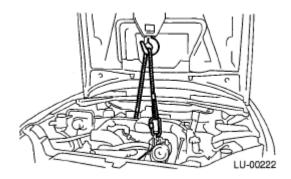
Supporting Engine With Lifting Device And Wire Ropes
